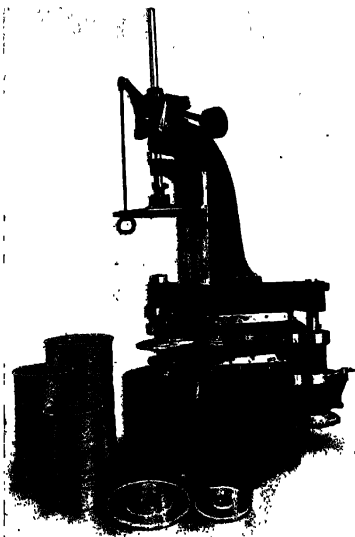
Semi-automatic flanging-and-seaming machine.
